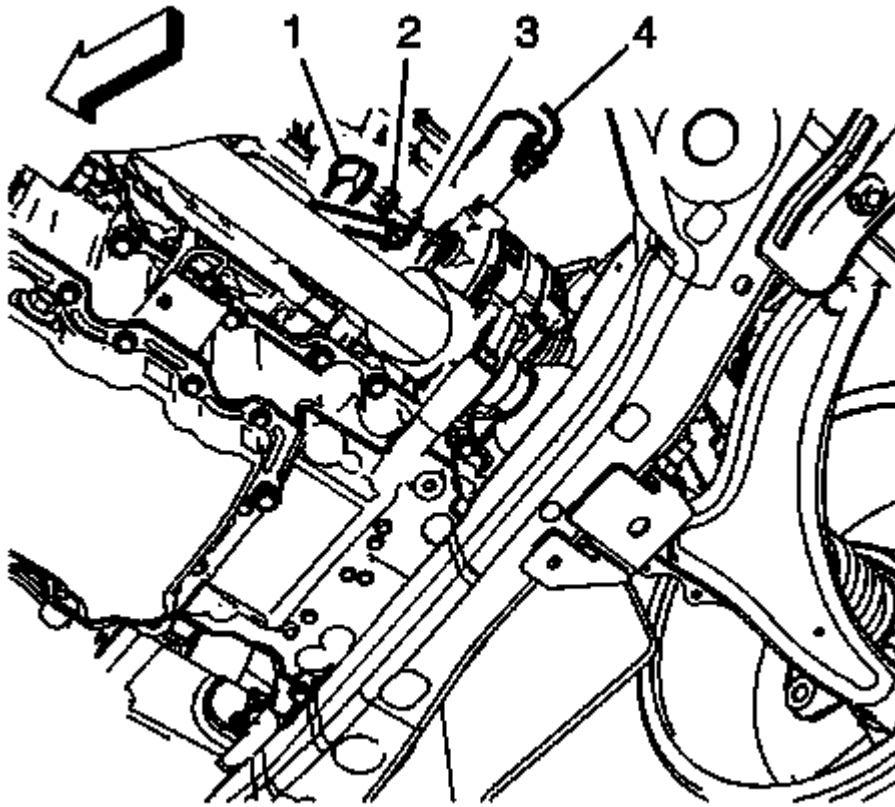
Protective Boot And Battery Positive Cable Fastener
